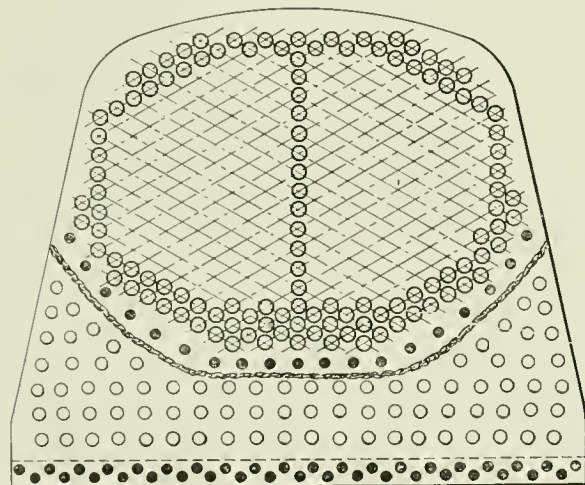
Method of Applying New Tube Sheet Section; Gas or Electric
